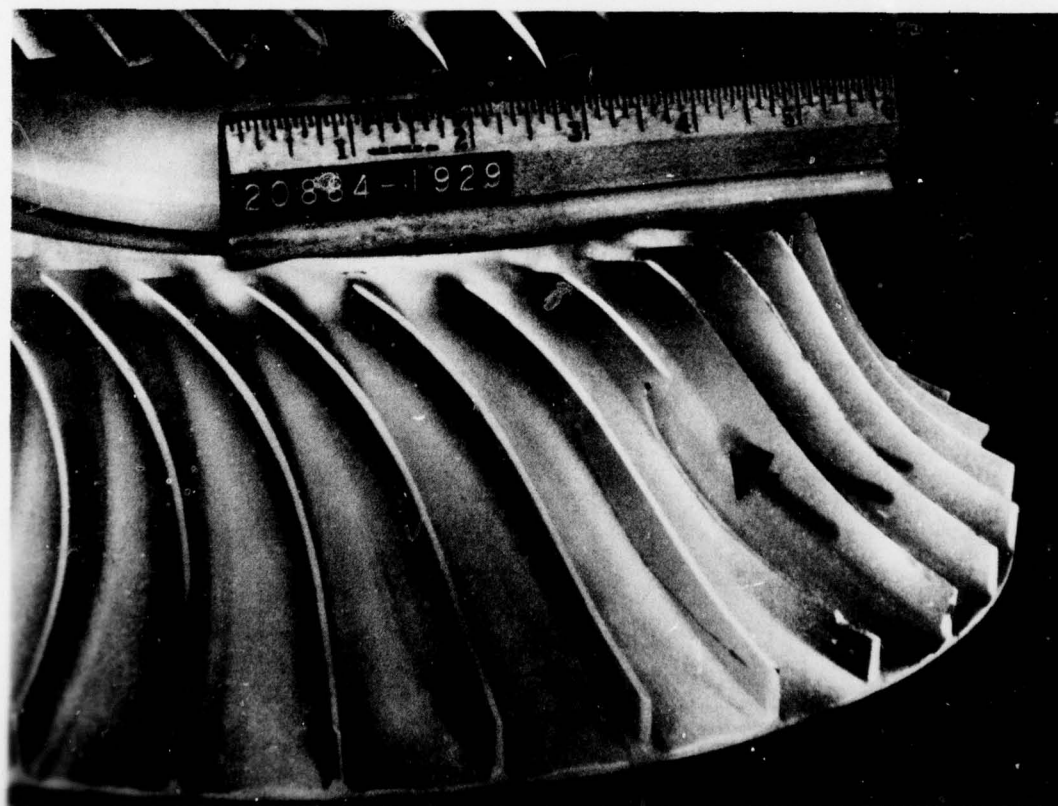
Centrifugal Impeller Showing Vane Damage
